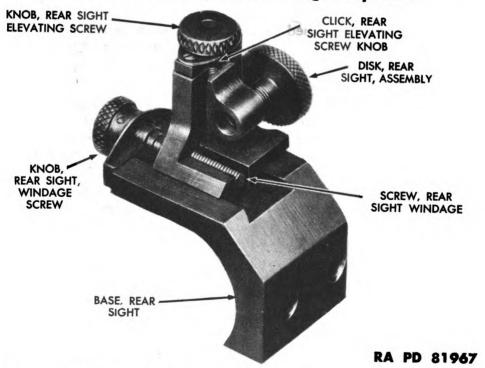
Rear Sight Assembly of Stevens Rifle, Cal. .22, Model 416-2 — Left Front View
